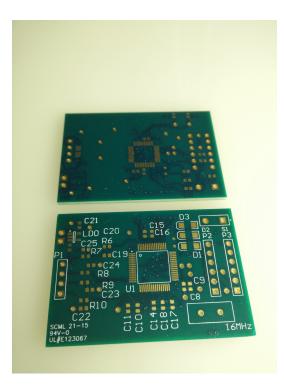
The image shows the top and bottom view of the custom designed printed circuit board for the ear-EEG system prior to assembly.
